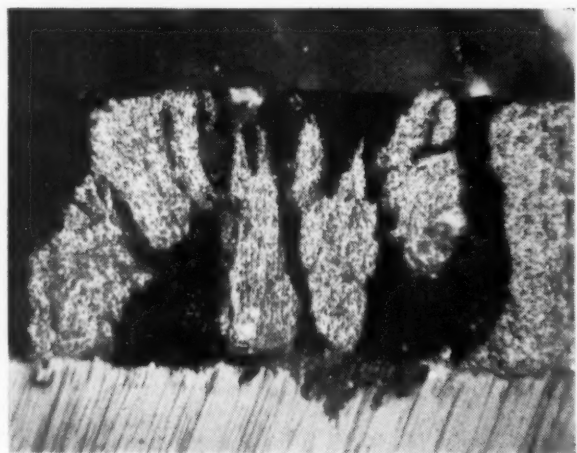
FINE-GRAIN COPPER-LEAD BEARING FROM A HEAVY-DUTY ENGINE WHICH HAS FAILED BECAUSE OF LOW-TEMPERATURE CORROSION—BOTH THE COPPER AND THE LEAD HAVE BEEN REMOVED
